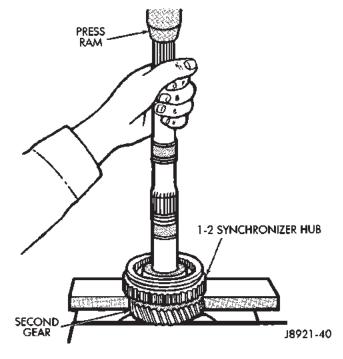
Remove Second Gear And 1–2 Synchronizer/Reverse Gear
